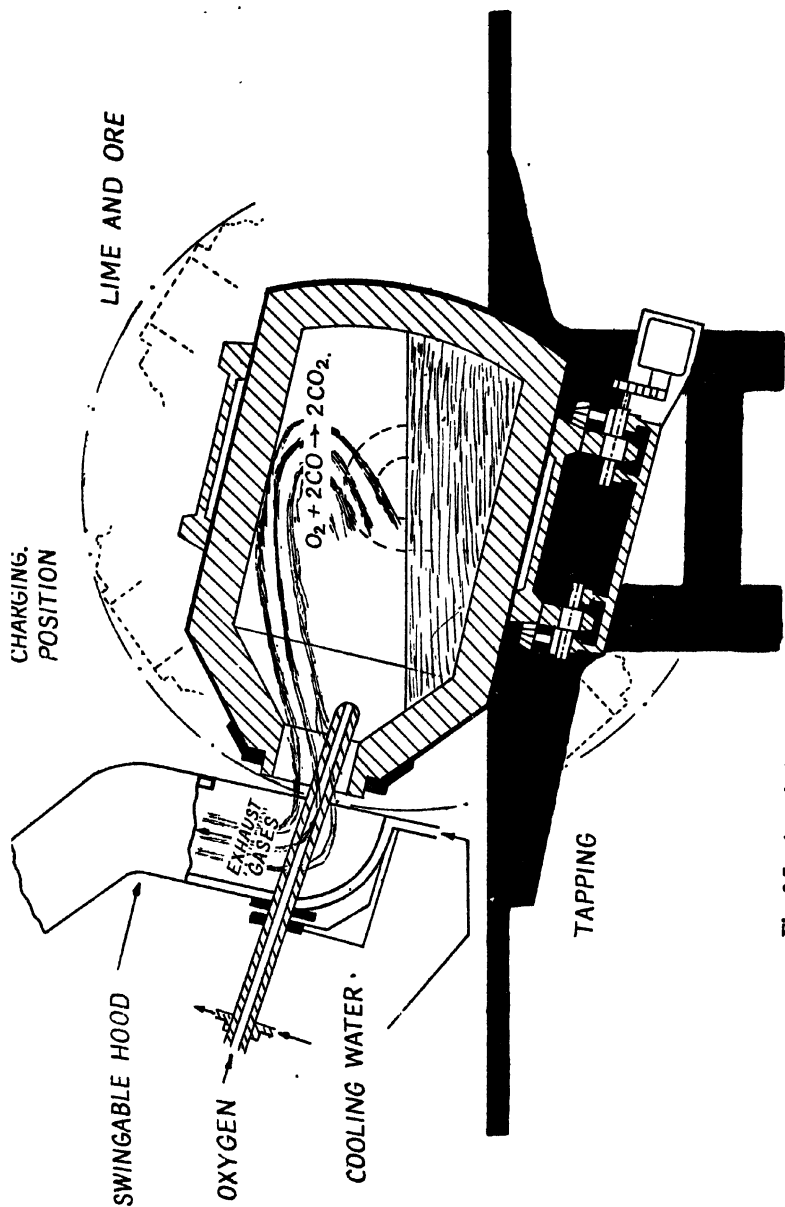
A typical Kaldor vessel. (By courtesy of Iron & Steel Engineer).
